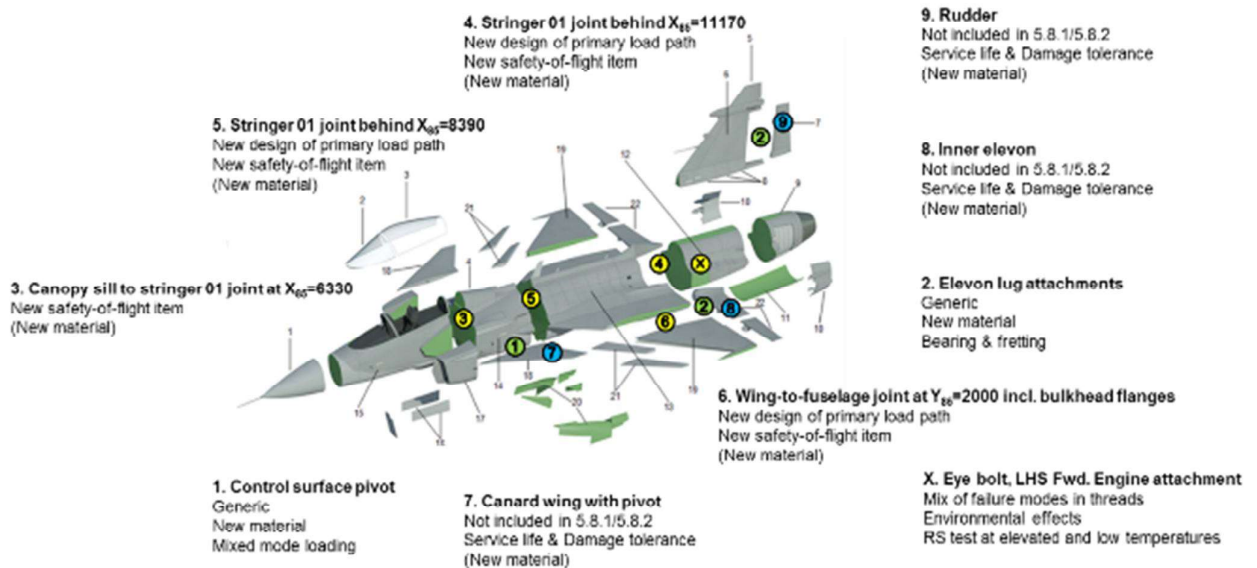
Full-scale damage tolerance tests of assemblies having artificial defects installed.
